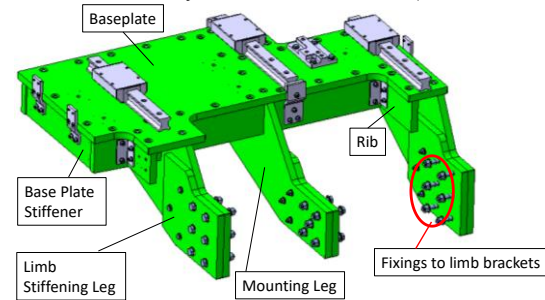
Main GRP components of the M1&M3 Platform Assembly
